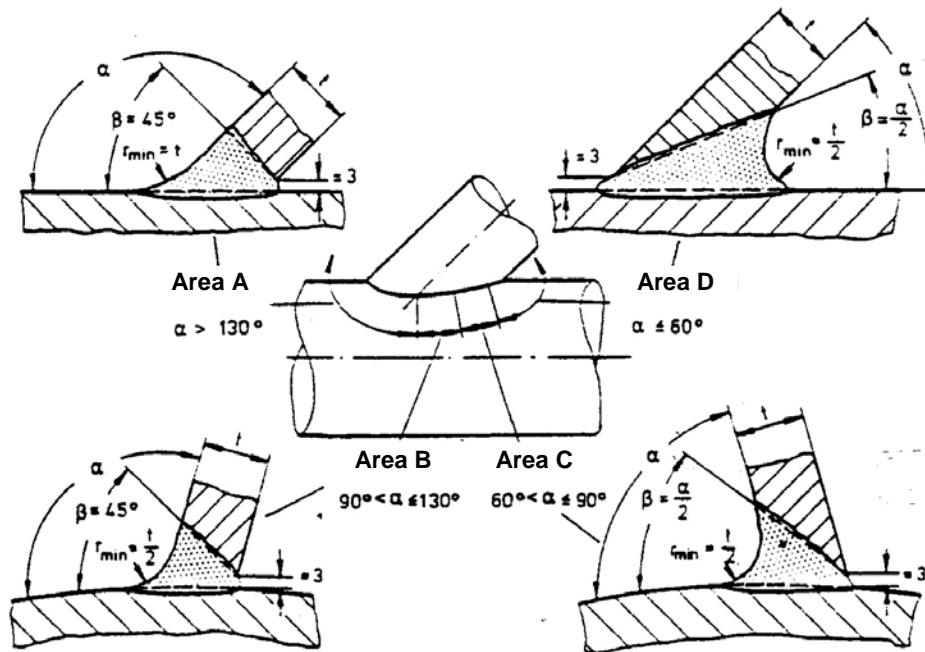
Connections welded one-sidedly (tube connections not accessible from inside)
